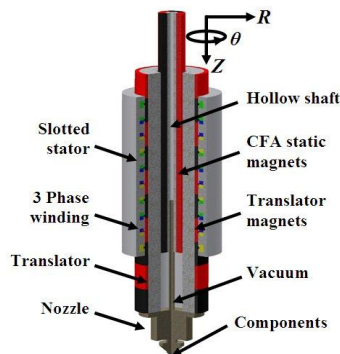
Linear part of the placement head consisting of a tubular permanent magnet actuator combined with a passive linear constant force actuator.
